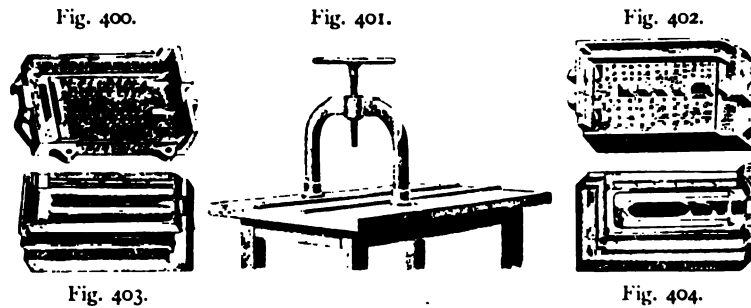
Frame to receive the Upper Mould. Fig. 401.—Table on which the Moulds are pressed. Fig. 402.—Frame to receive the Lower Mould. Fig. 403.—Matrix of the Bottom of the Tile. Fig. 404.—Matrix of the Top of the Tile.
